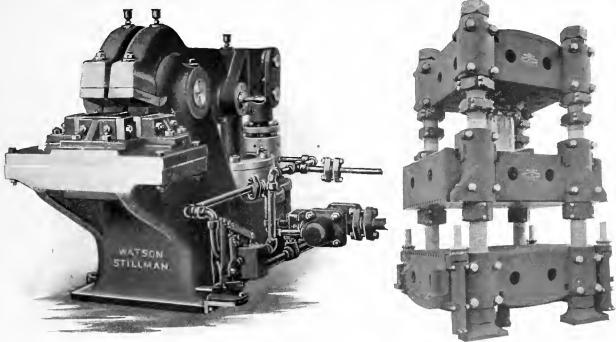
Hydraulic Coping Machine. Watson-Stillman Co.
